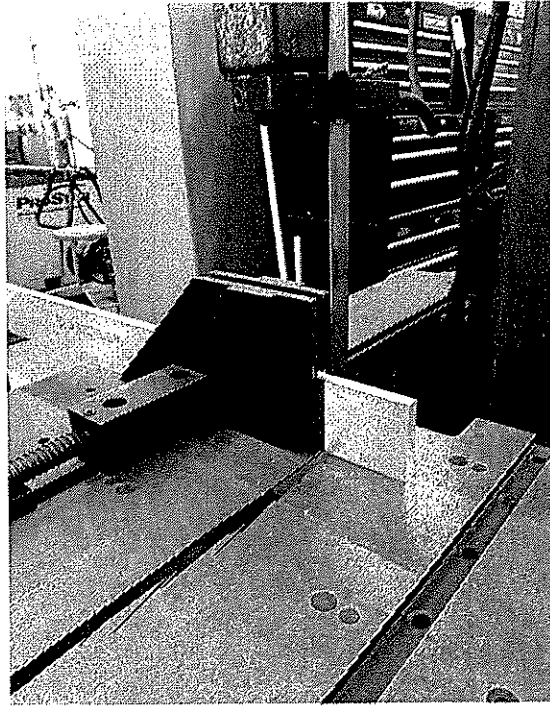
MetalMizer band saw cutting the 3" flat bar.
